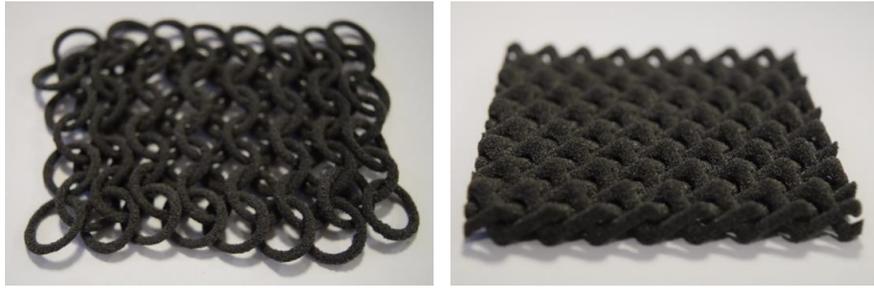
Complex geometrical parts manufactured in the Sintratec Kit. Images: FS.
